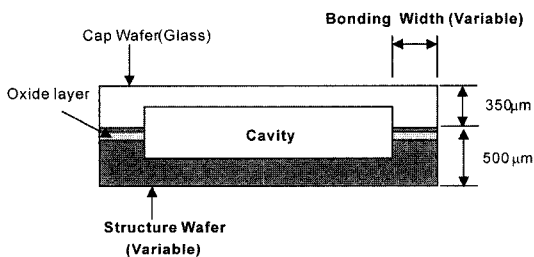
Layout of wafer level vacuum packaging without moving structure and via hole for leakag test.
